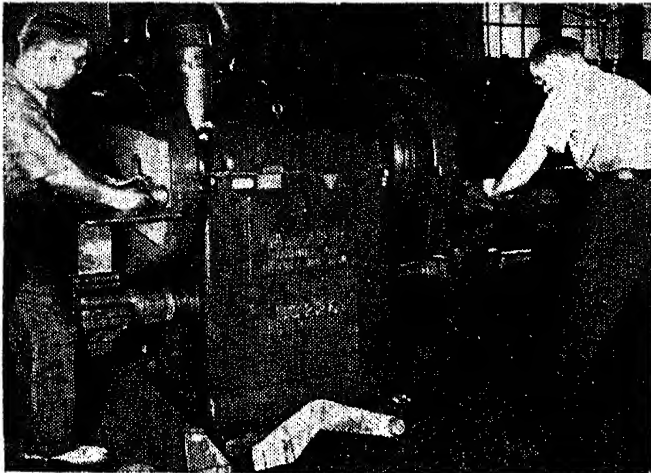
A 26 in. single horizontal spindle disk grinder. (Courtesy Gardner Machine Co.)
